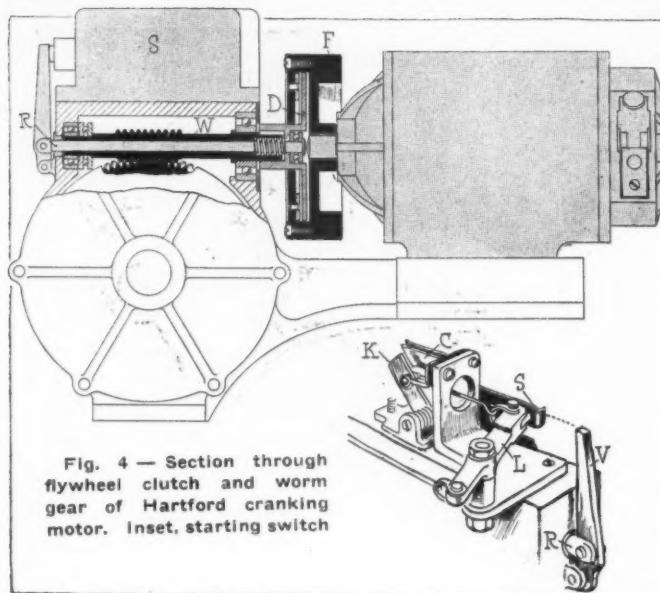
Section through flywheel clutch and worm gear of Hartford cranking motor. Inset, starting switch
